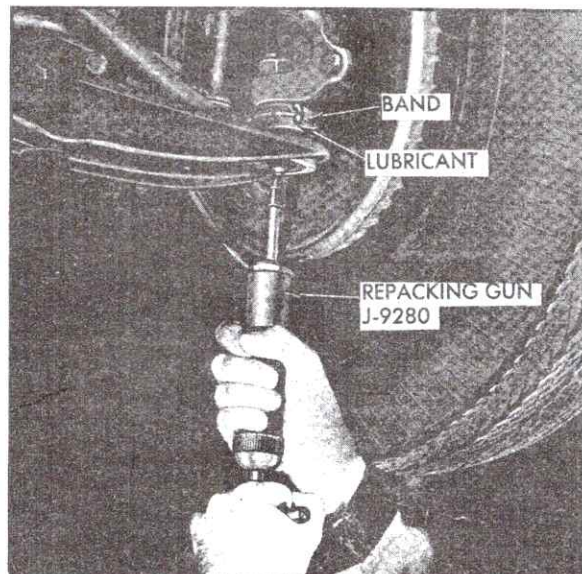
Repacking Front Lower Spherical Joint Seal
